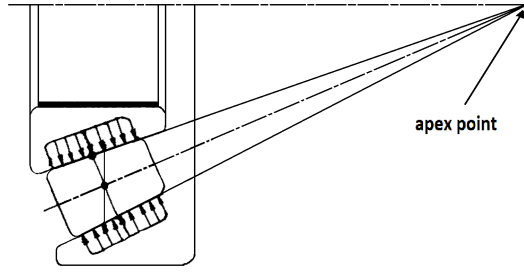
Tapered roller bearing principle (adapted from [5]).
